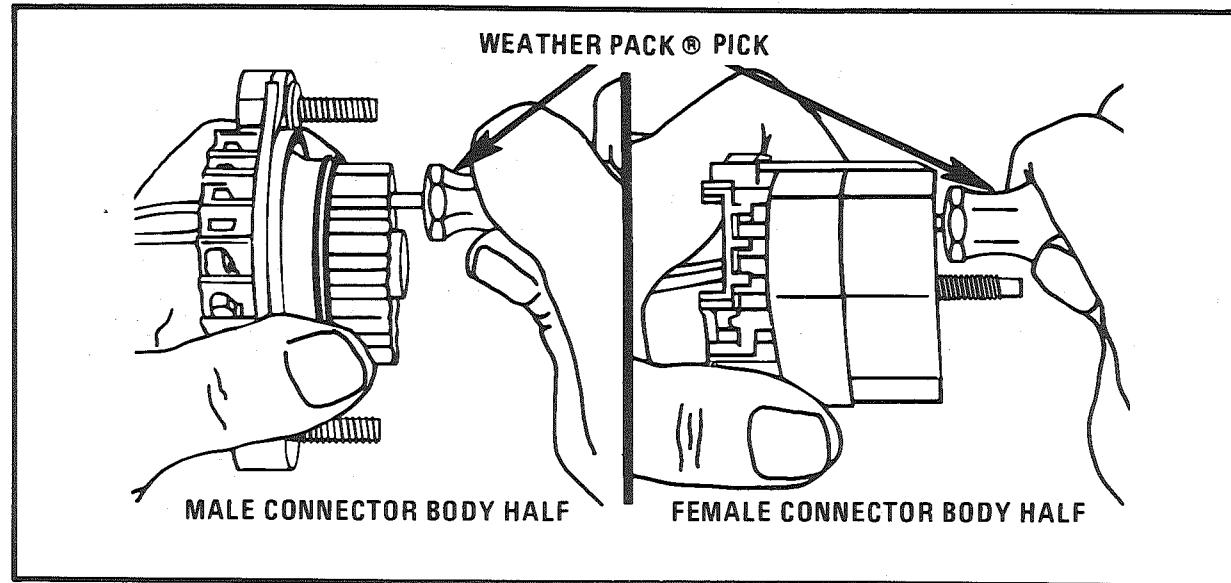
Releasing The Terminal Locking Tangs (Large Connector)
